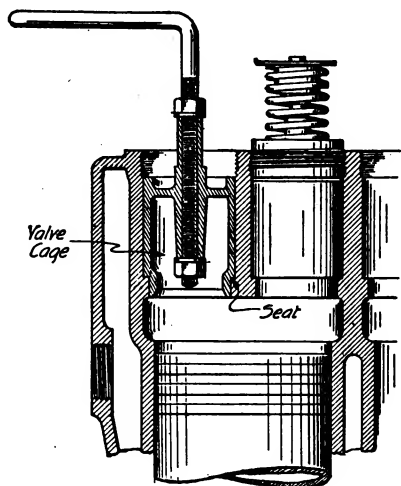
Simple Fixture for Grinding-In Overhead Valve Cages
